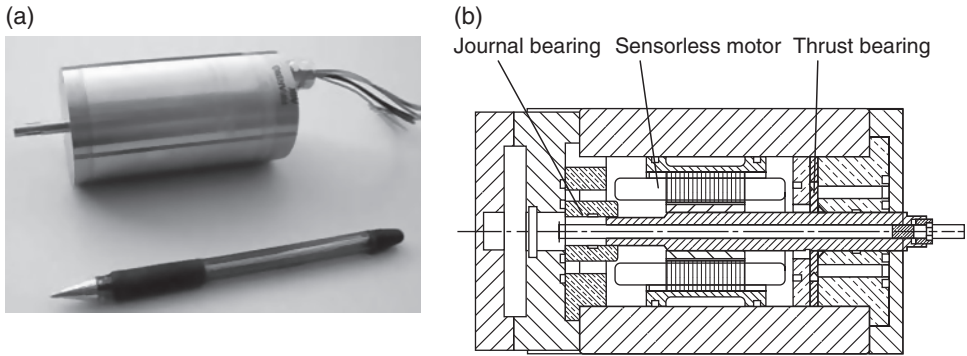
The ultrahigh speed aerostatic bearing spindle driven by a sensorless DC motor (a) photograph of the developed miniature spindle; (b) a schematic of the spindle
